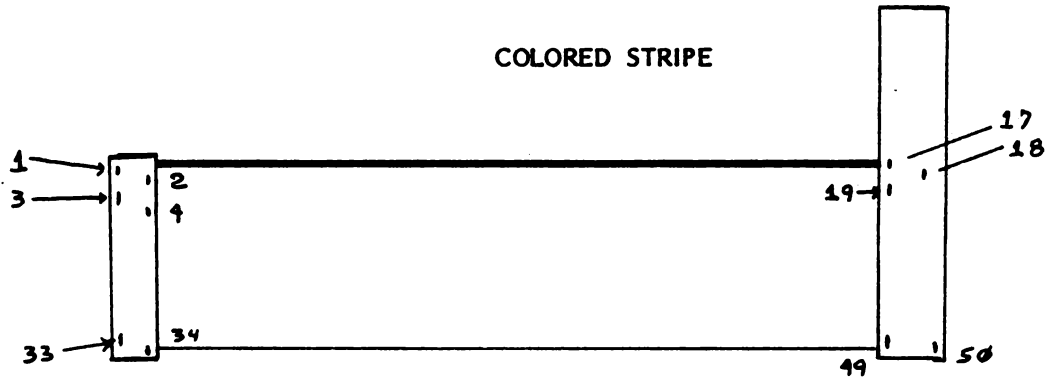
ASSEMBLY DIAGRAM - 8 INCH DRIVE CABLE
